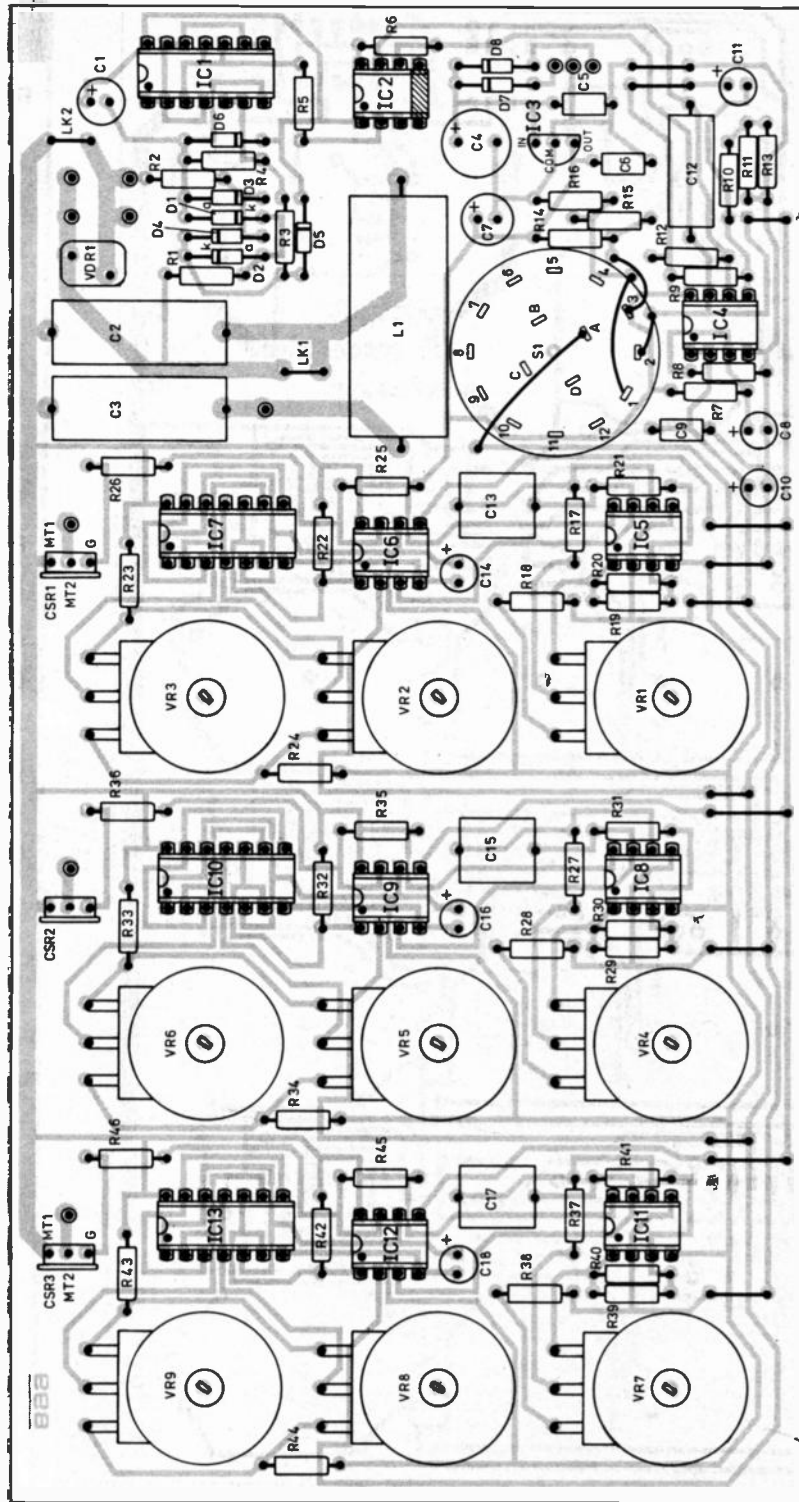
Printed circuit board component layout. The full size copper foil master for the 3-Channel Lamp Controller is shown on the opposite page.
